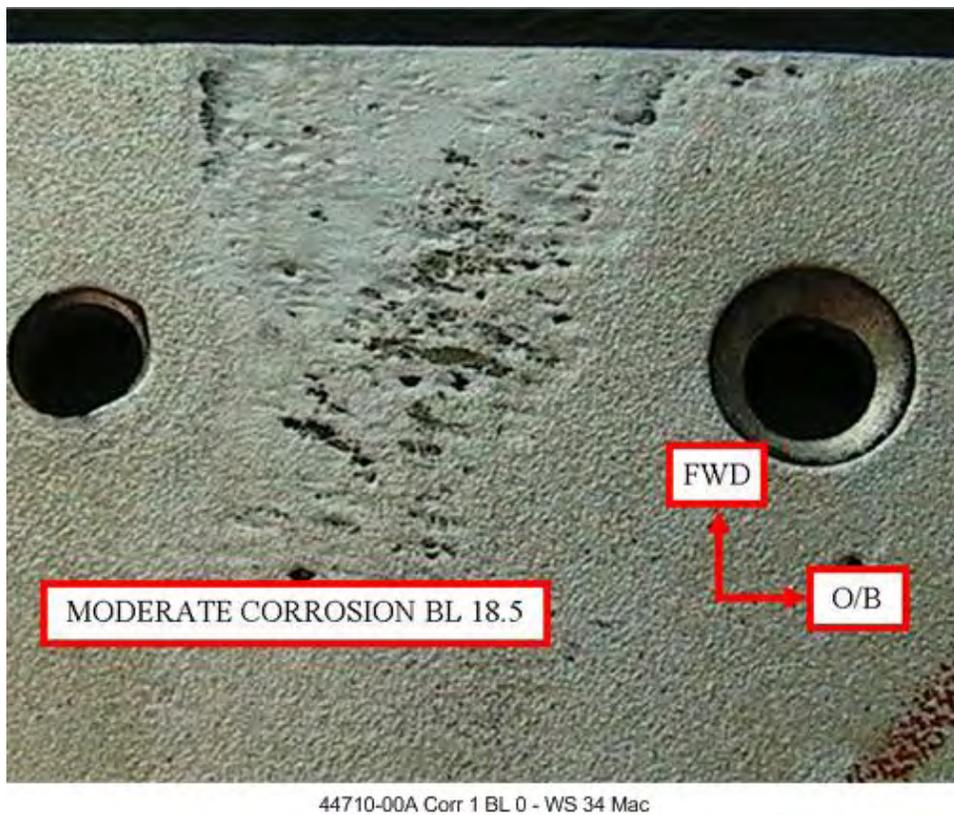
Macroscopic View of Moderate Corrosion on the Left Wing Plate Wing Panel Reinforcement Assembly BL 18.5
